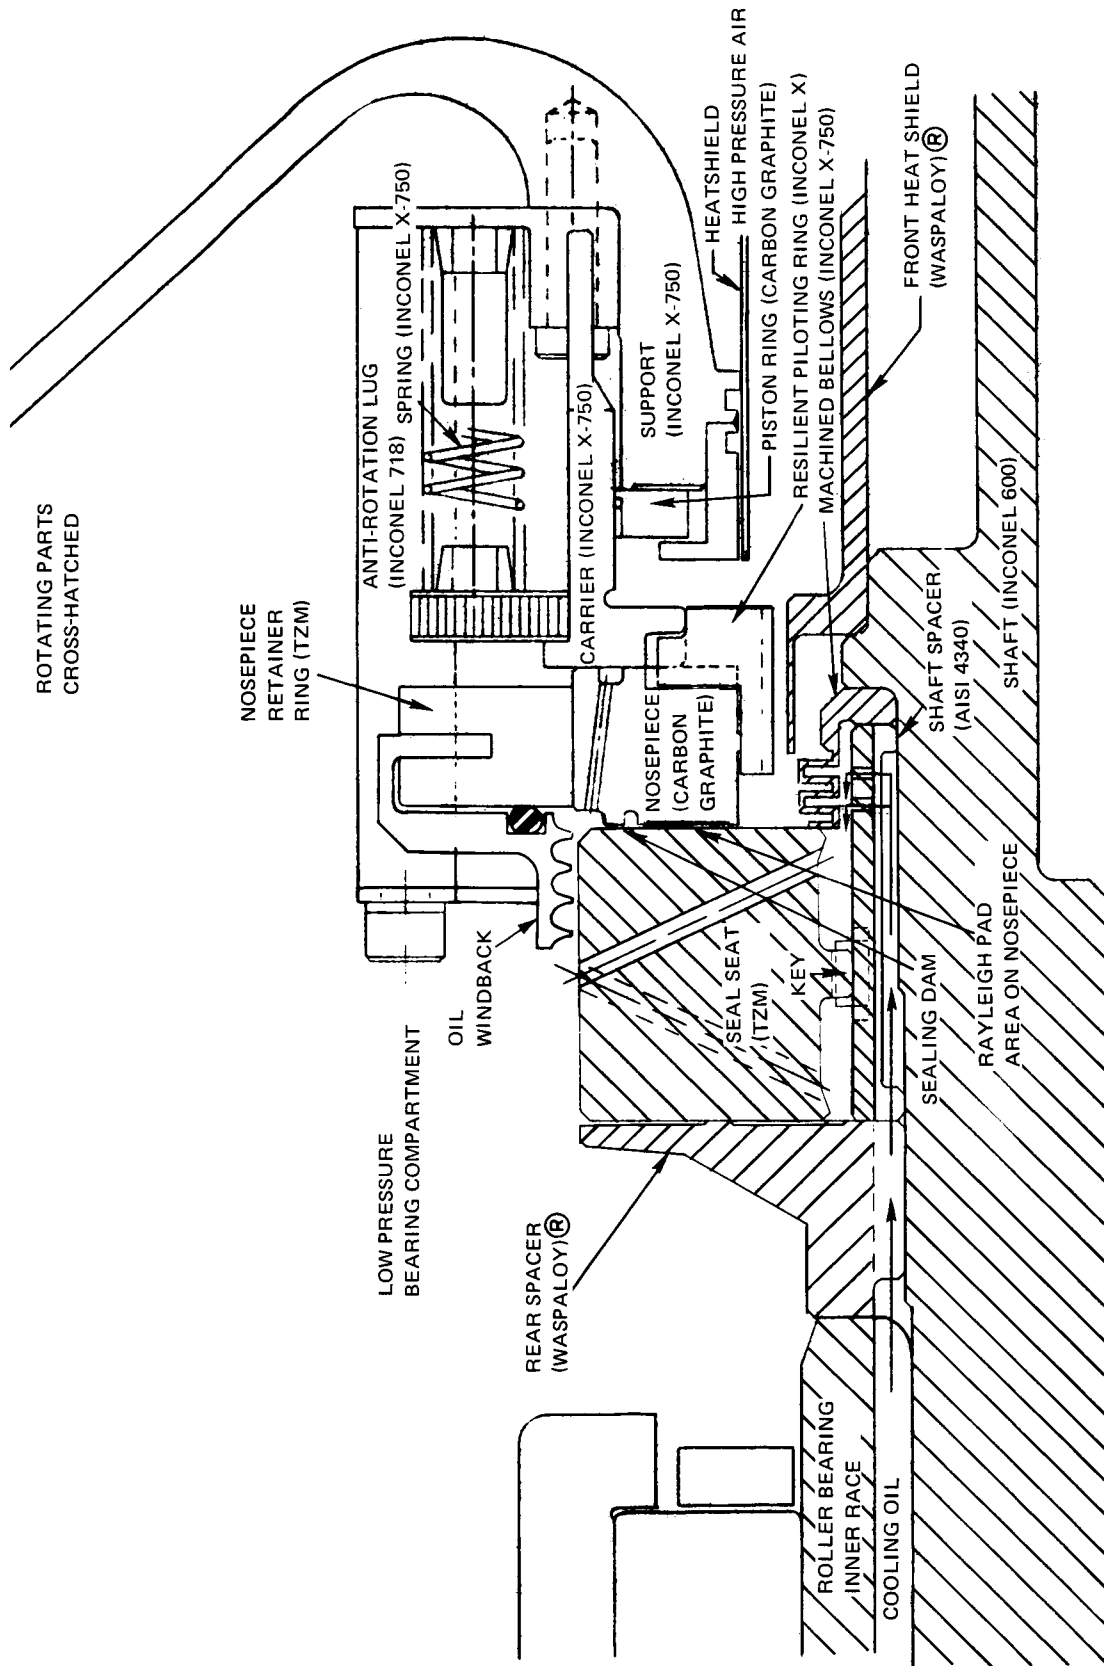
Initial Hub and Seal Assembly for Elevated Temperature Testing Showing Small Diameter Narrow Seal Seat, One Piece Rear Spacer, and Oil Windback
